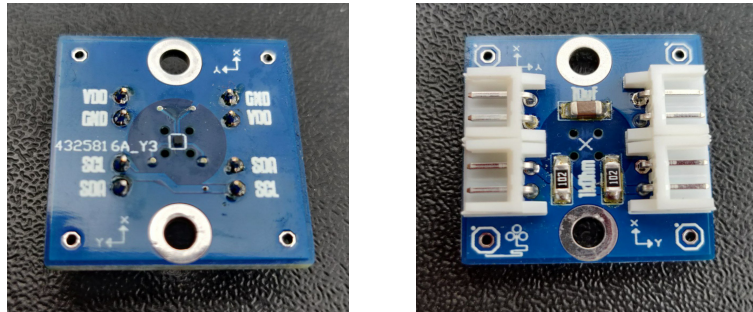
and Figure 5.3 show the assembled and unassembled sensor adapter PCB. To facilitate experimental setups, we made sure to include mounting possibilities like two screw holes and four holes on the PCB edges for pin strips. By that, the PCB can be physically mounted on wooden boards or a breadboard. We chose angled connectors with reverse polarity protection, in order to decrease the risk of damage or malfunction, to avoid obscuring the area over the PCB and to facilitate mounting procedures with the sensor pointing upwards. Note that the holes currently used by connectors can also be used for pin headers with 2.54mm spacing, making breadboard mounting possible. Similar to Liang et al. [2015], this lays the groundwork for an adjustable sensing area.
